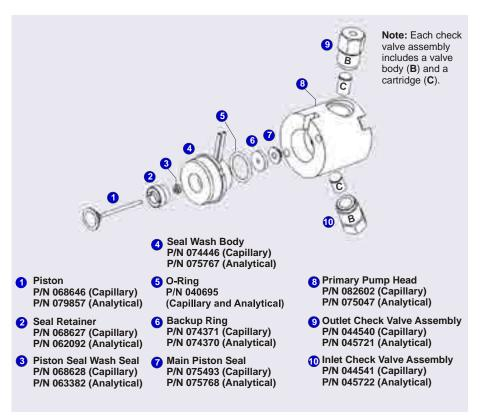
DP/SP Pump: Primary Pump Head Assembly
